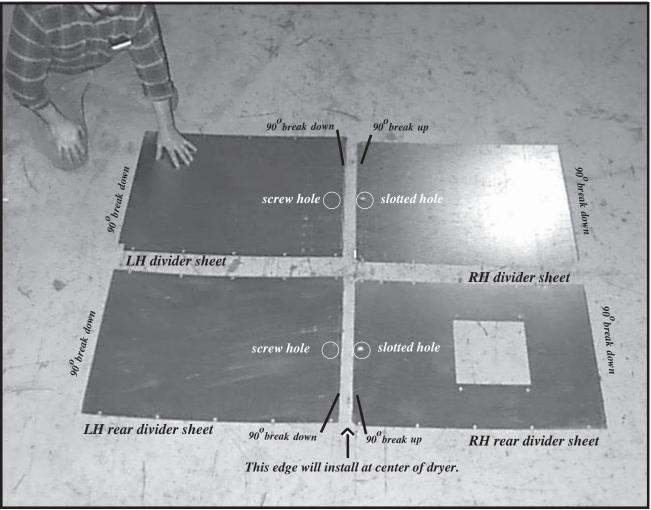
Level plenum divider and level plenum divider end are shown aligned as they will be installed in rear of dryer. (RH rear divider sheet shown without clean-out door guides and clean-out door.)
